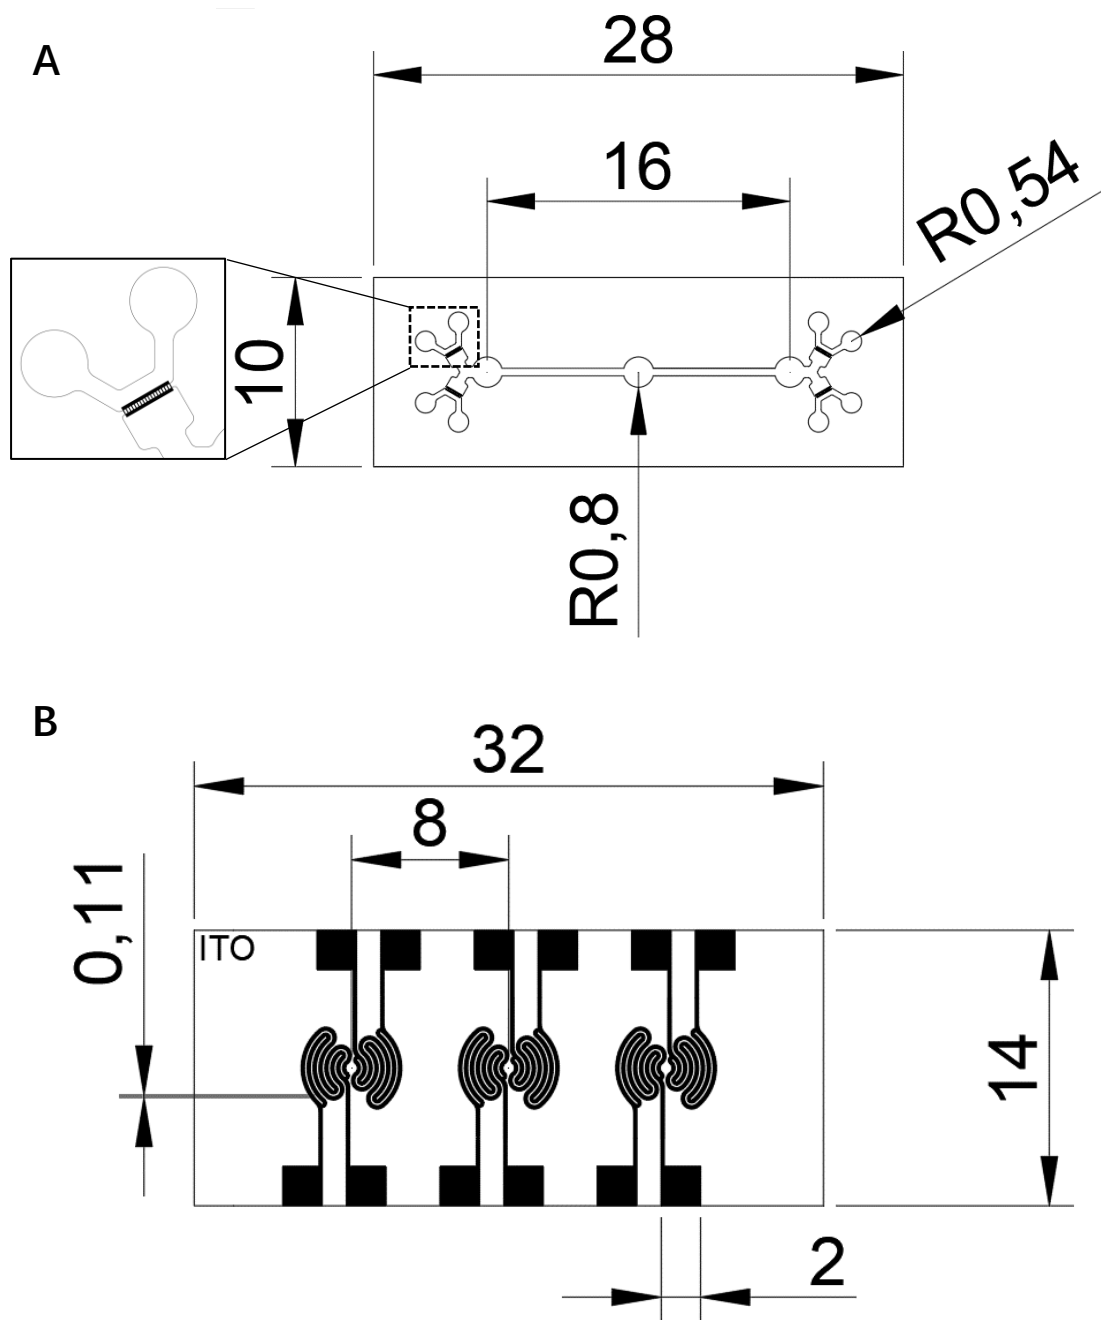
(A) The design and dimensions of microfluidic chip. (B) The design and dimensions of ITO. (in mm)
